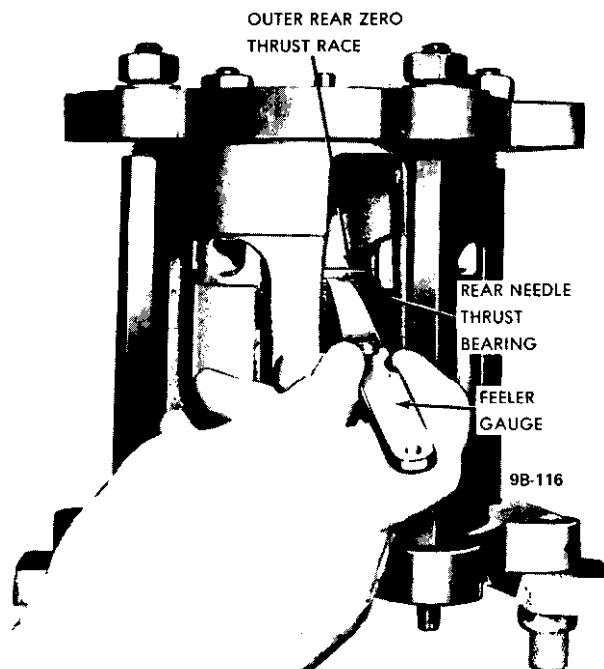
B-144 Gaging Clearance Between Rear Needle Thrust Bearing and Outer Rear Thrust Race
